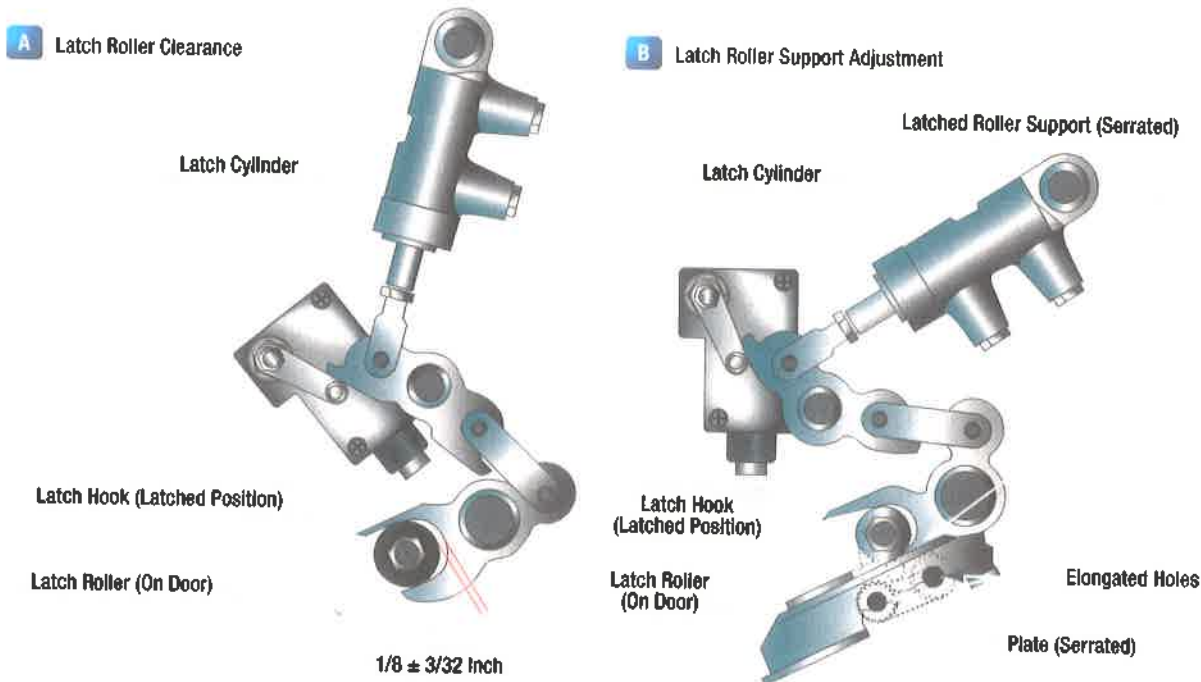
Main landing gear door latch roller clearance measurement and adjustment.
